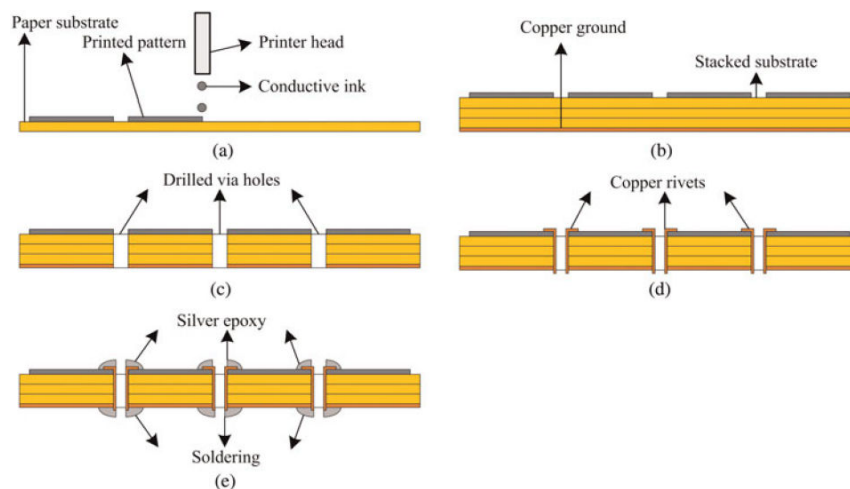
Different steps of the fabrication process of SIW components on paper substrate: (a) Inkjet print the pattern; (b) Stack the multi-layer substrate after sintering; (c) Drill via holes; (d) Insert copper rivets; (e) Encapsulate
